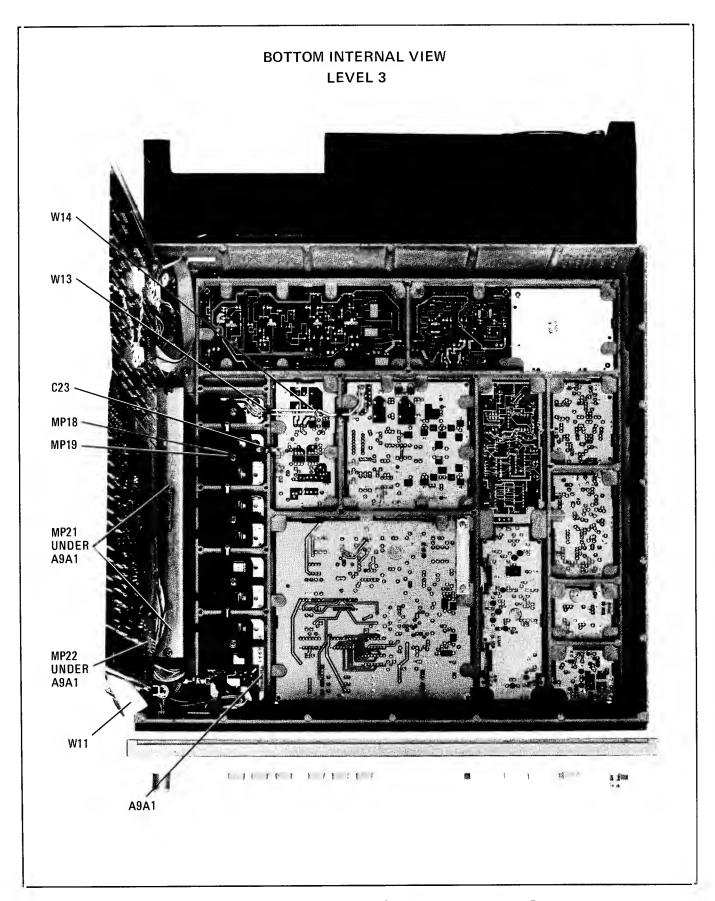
Bottom Internal View; A10/A11 Assemblies in Service Position
